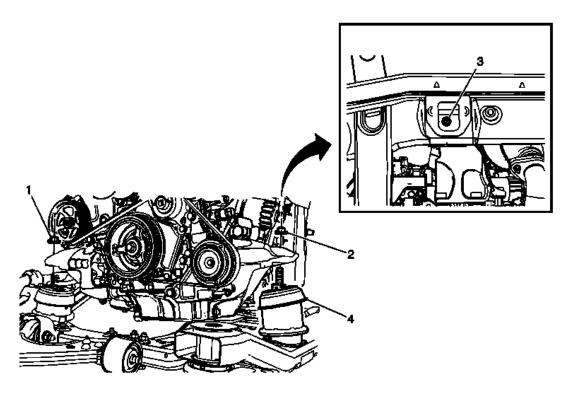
Identifying Engine Front Mount Assembly Courtesy of GENERAL MOTORS COMPANY
